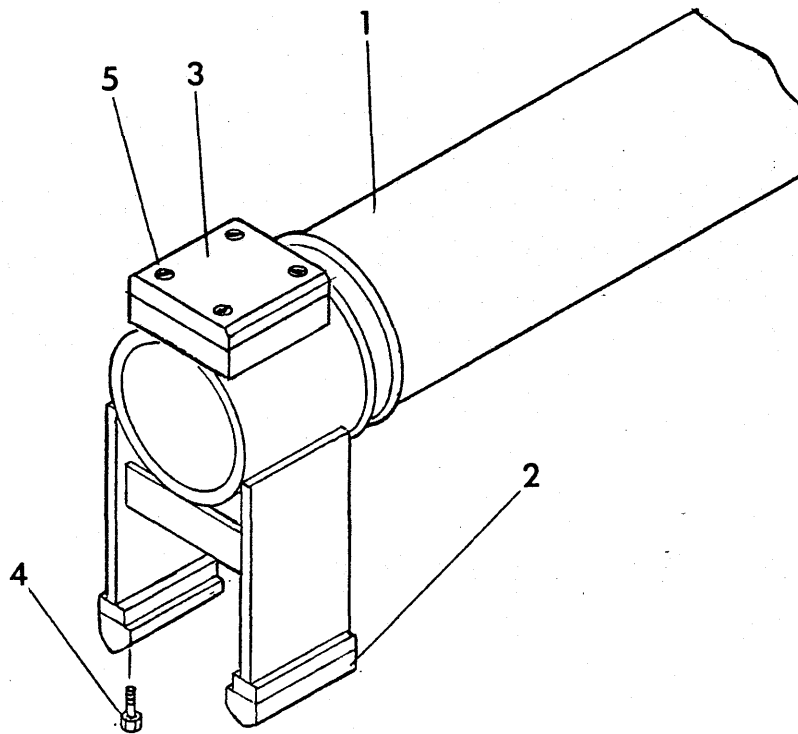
E - BOOM EXTENSION CYLINDER (68)
